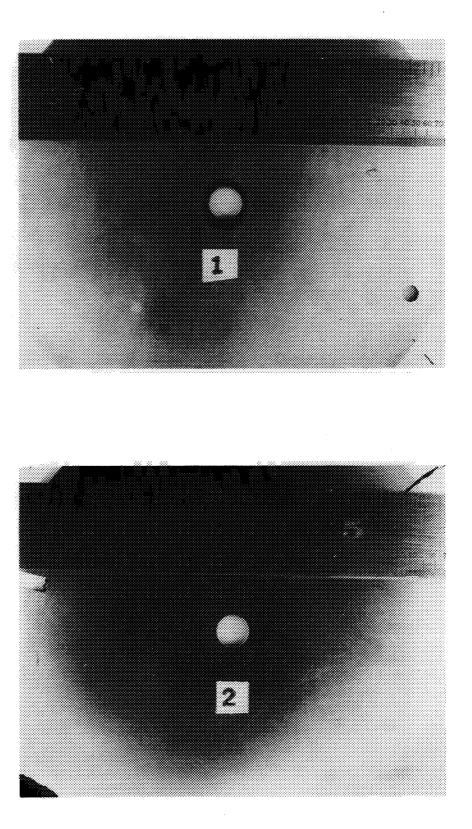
(a). FOOTPRINTS ON MATED PAIR OF 1/16 INCH PLATES.
